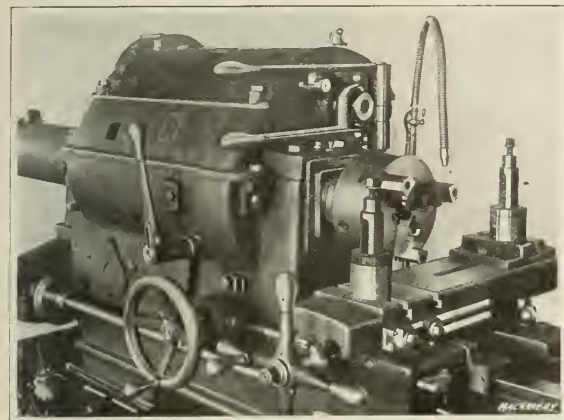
All-g geared Head for Foster No. 5 Screw Machine
